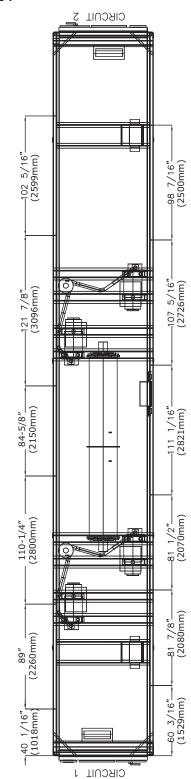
RTAF unit dimensions, mounting point locations - 450, 500 ton
